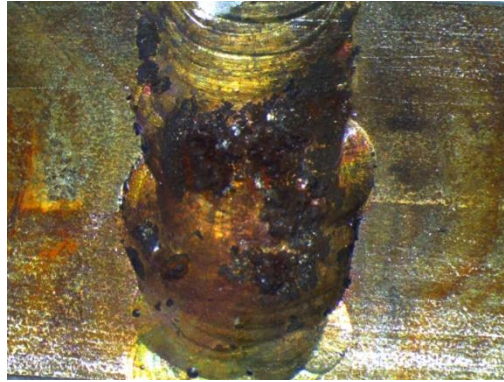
small tubercles on a 304 stainless steel weld metal
